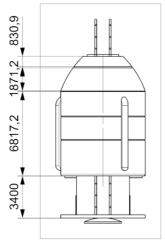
Side view of the climber with dimensions (mm) [own source].
